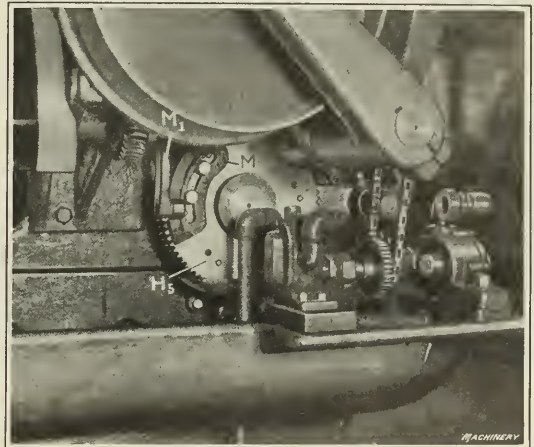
Cam Position for operating Clutch for Left-hand Threading
